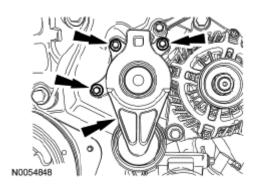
Locating Accessory Drive Belt Tensioner Bolts Courtesy of FORD MOTOR CO.
